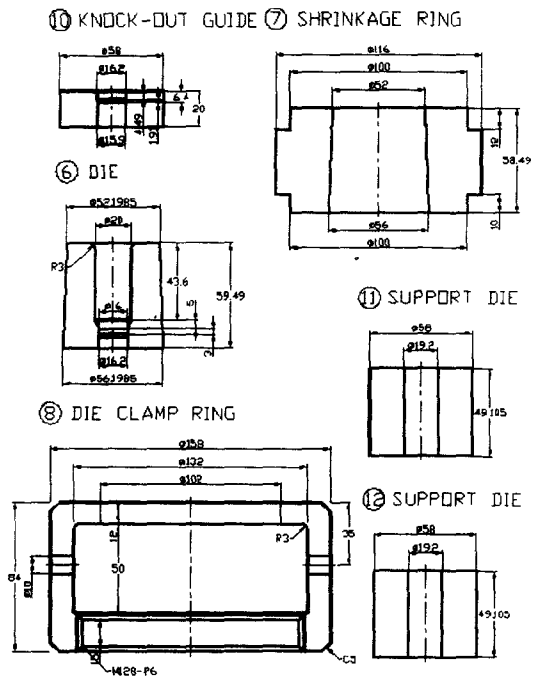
(a) Details of die components for forward extrusion die(lower parts of a die)
